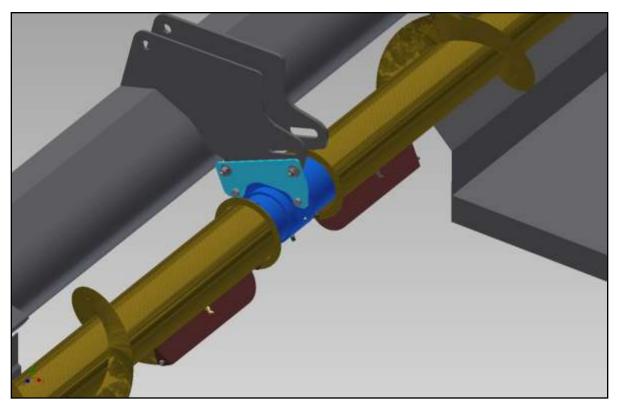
CENTER MOUNT EXTERNAL VIEW
